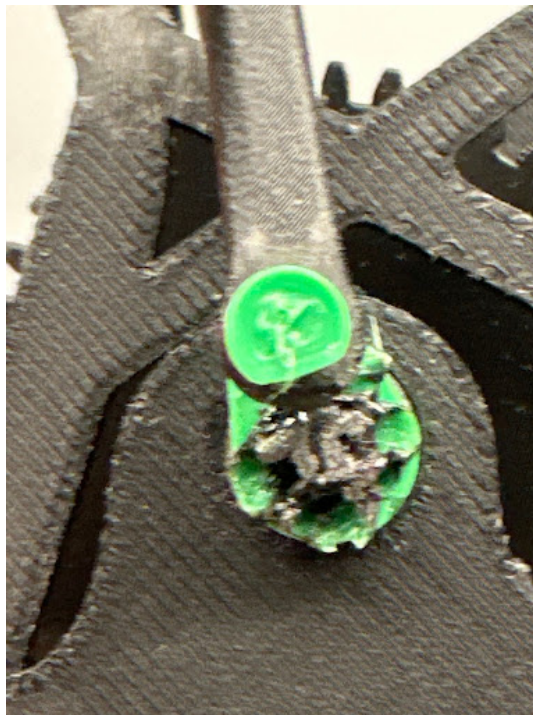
After sliding the cranks on, I used a soldering iron to fuse them with the axle.
